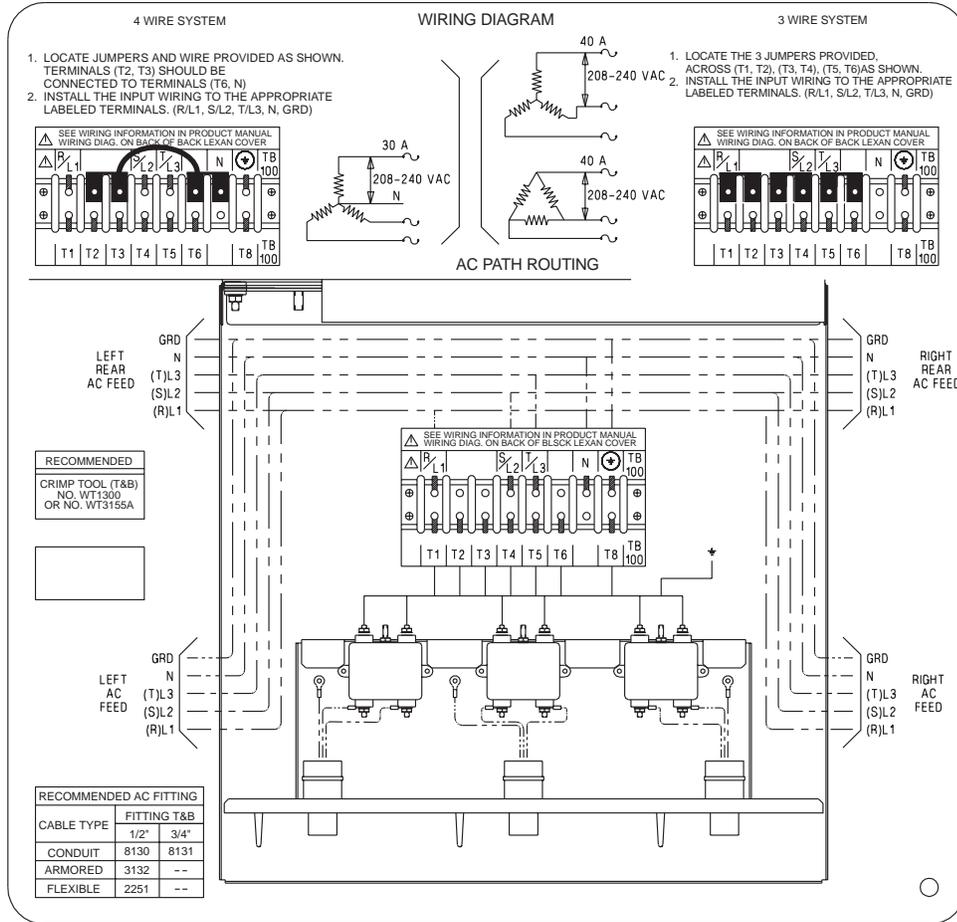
AC Wiring to Rectifier Housing Assembly
